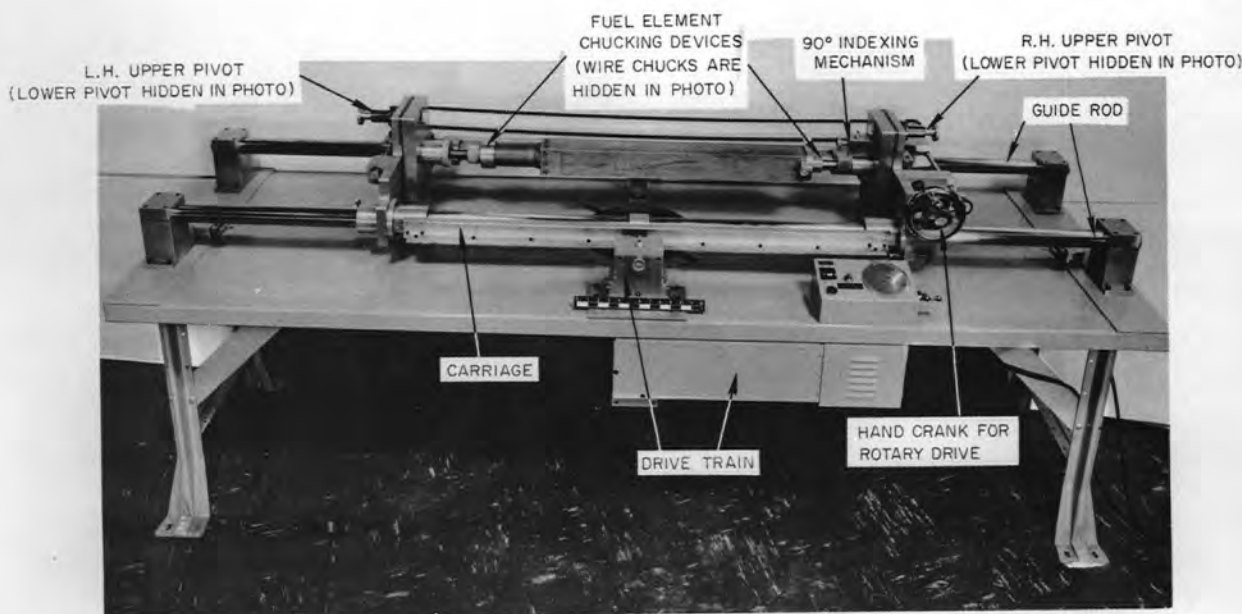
Fuel-Element and Wire Scanner, Front View. Dummy fuel element in chucks, detector and shield omitted.
